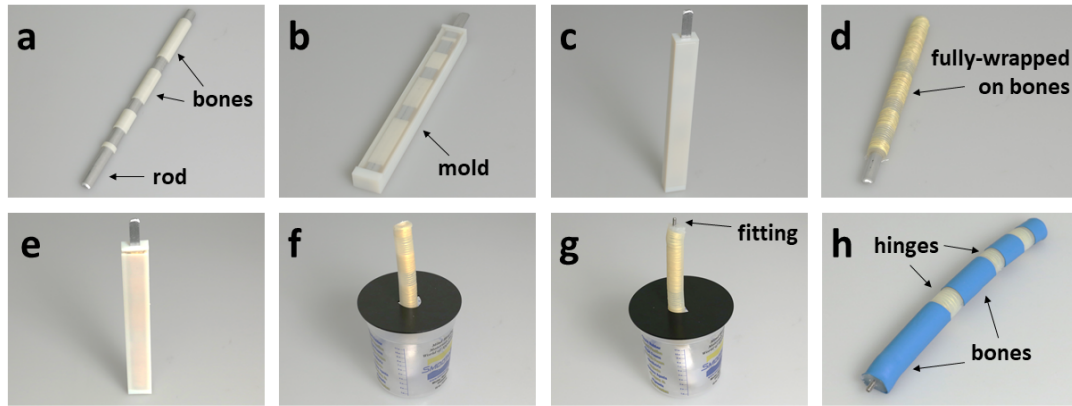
Manufacturing process for constructing a bone-inspired soft robot. (a) Place plastic bones on the half-round rod. (b) Place the rod on the mold and add elastomer. (c) Keep the mold upright to cure. (d) Add fiberglass cloth to the flat side and wrap the soft tube with Kevlar thread. (e) Repeat steps 2 and 3 with the second mold to add skin. (f) Remove the rod and plug one side of the tube. (g) Add the vented screw as the fitting and plug the other side. (h) Add the shrink tubes to the bone areas for the final appearance.
